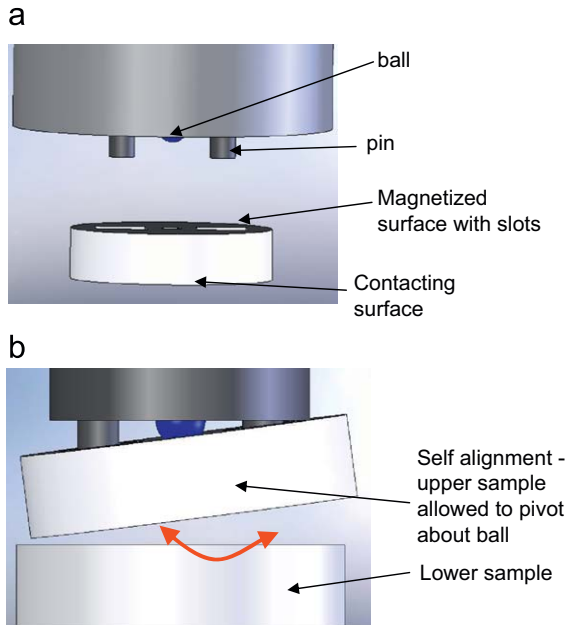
Illustration of self-alignment mechanism. (a) Unassembled. (b) Assembled. (Drawings created in Solidworks Educational Edition)
